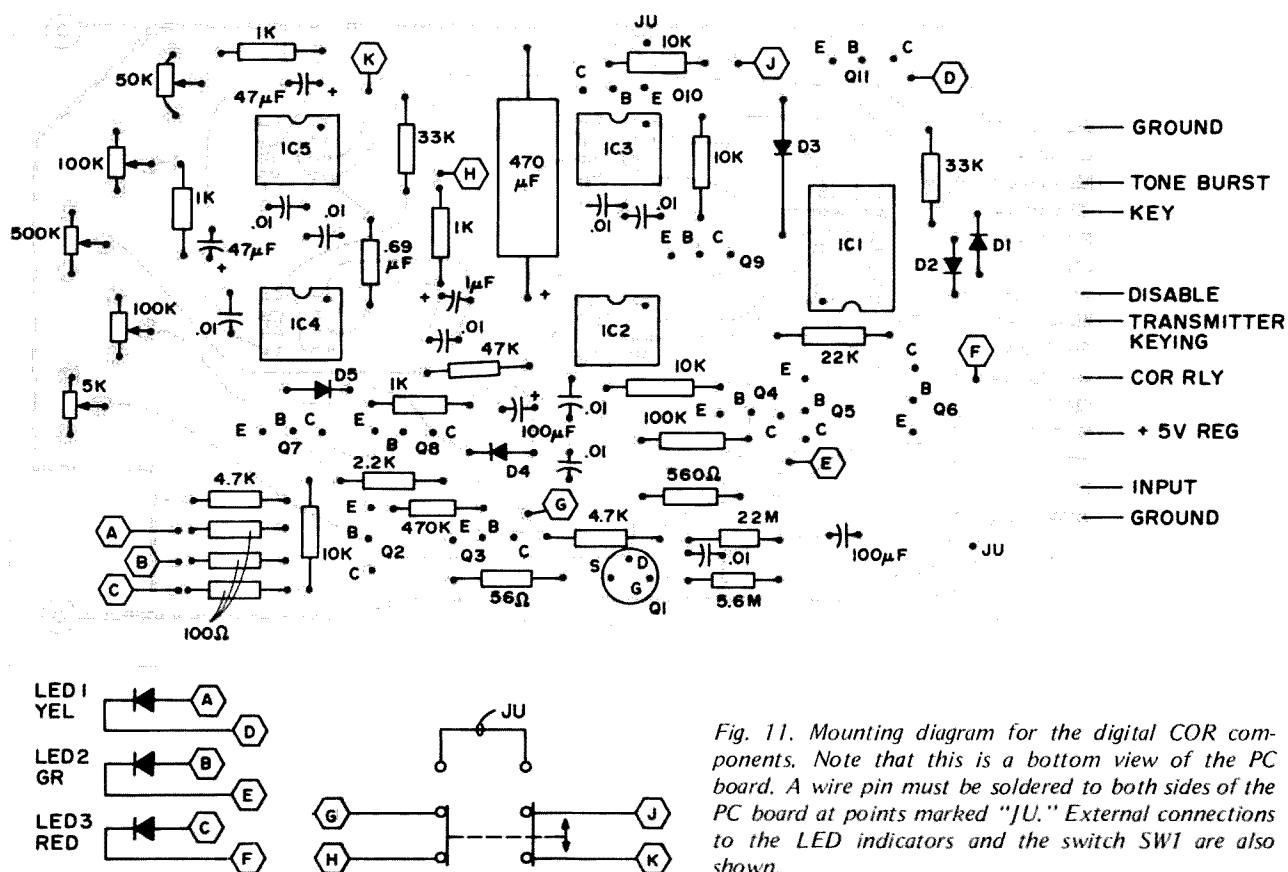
Mounting diagram for the digital COR components. Note that this is a bottom view of the PC board. A wire pin must be soldered to both sides of the PC board at points marked "JU." External connections to the LED indicators and the switch SW1 are also shown.
